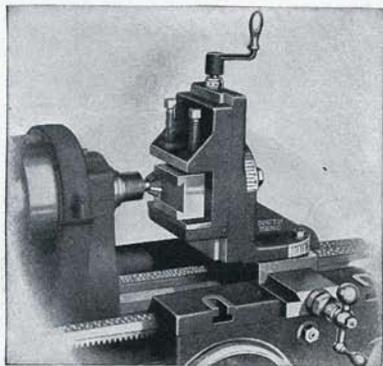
Milling and Keyway Cutting Attachment. Cat. No. 1. Price...\$40.00
